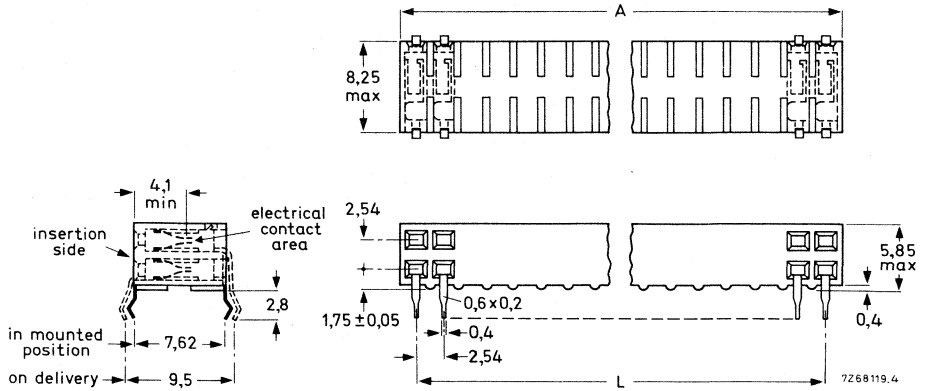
Board edge socket, double row. See Table 1 for dimensions A and L.
